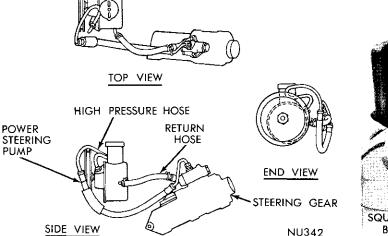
Hose Routing–1.06 Pump 8 Cylinder Engines
